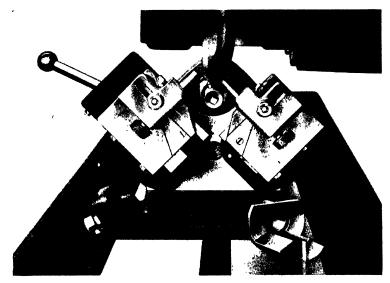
TRIPLE-DIAMOND TOOL FOR DRESSING WHEELS USED FOR SPLINE-SHAFT GRINDING (Churchill Machine Tool Co., Ltd.)
